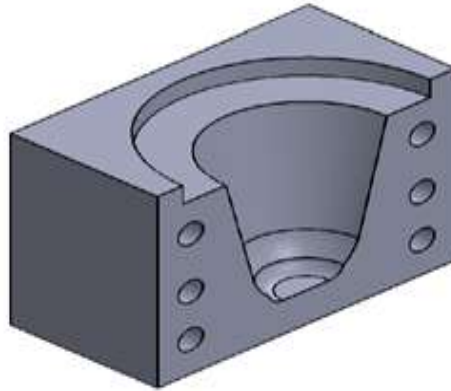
(a): 3D Model of a Half of the Two Piece Mould
